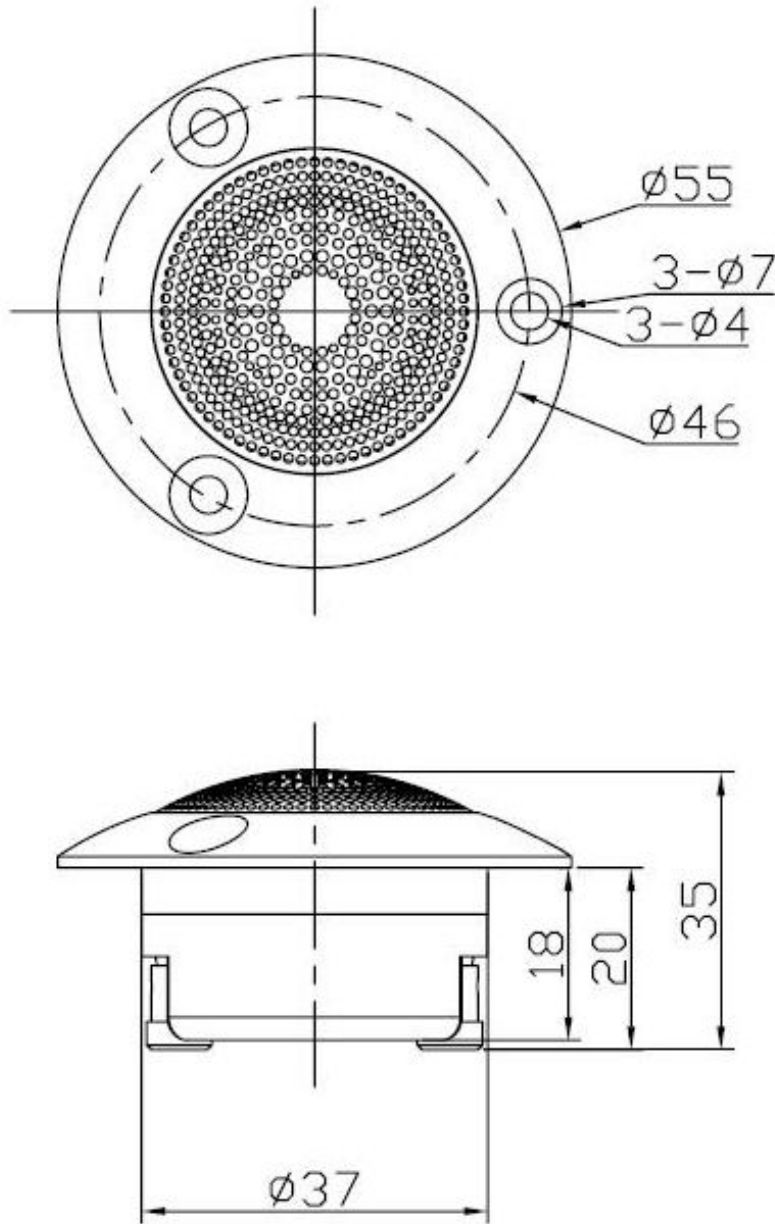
L1V2 tweeter - dimensioned mechanical drawing
